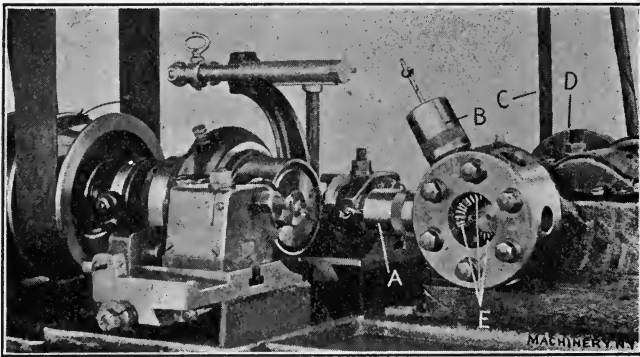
Brown & Sharpe Automatic Screw Machine equipped with Turret Drilling Attachment
